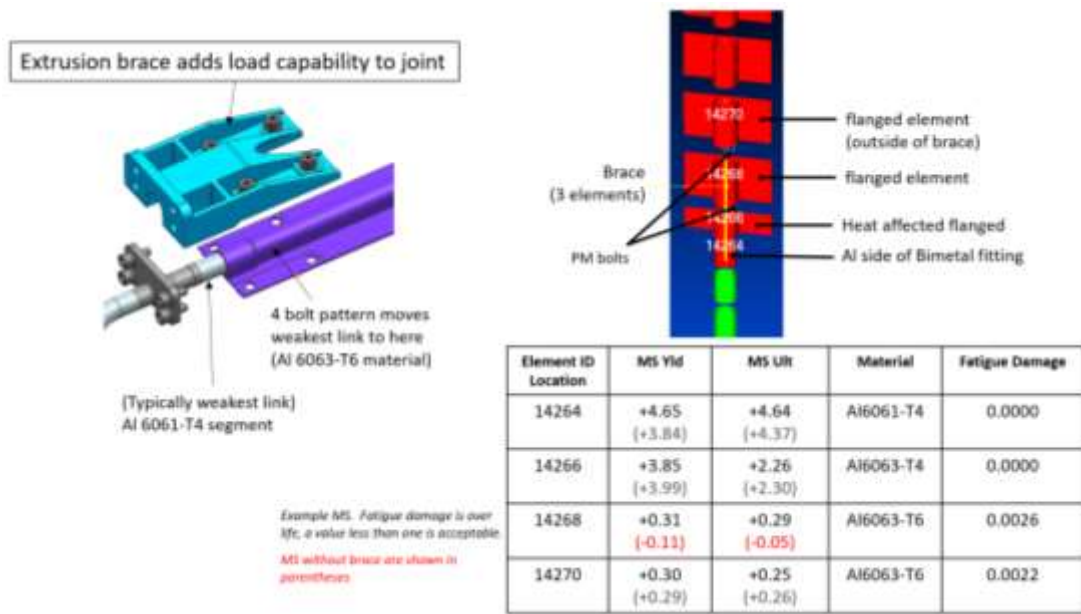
Braces for stainless steel to aluminum extrusions weld transition.
